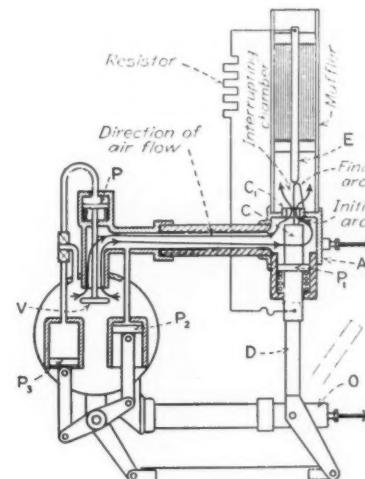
Extreme Left—Closed position of breaker showing arrangement of pneumatic equipment
